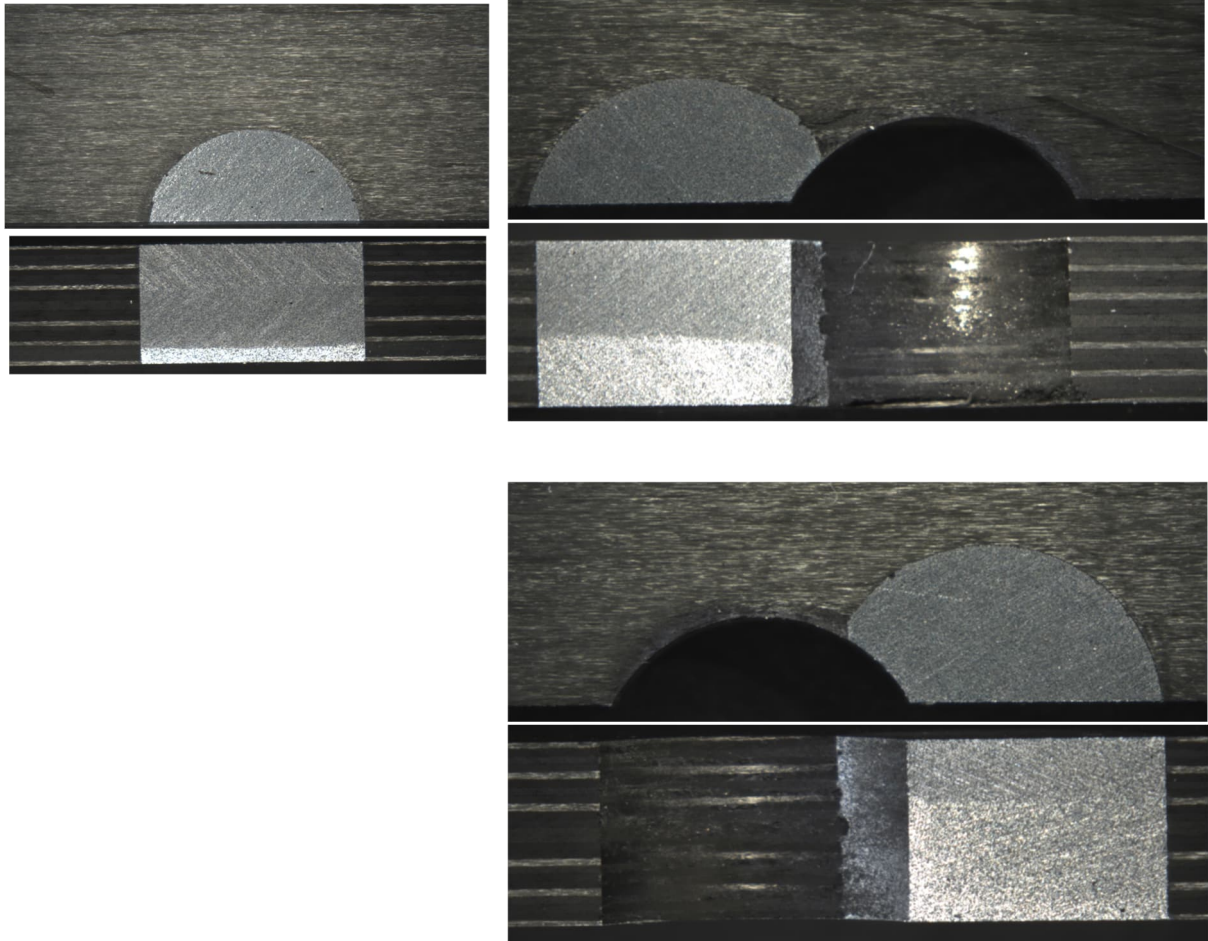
Top and cross-section views of the cut-up specimens.
